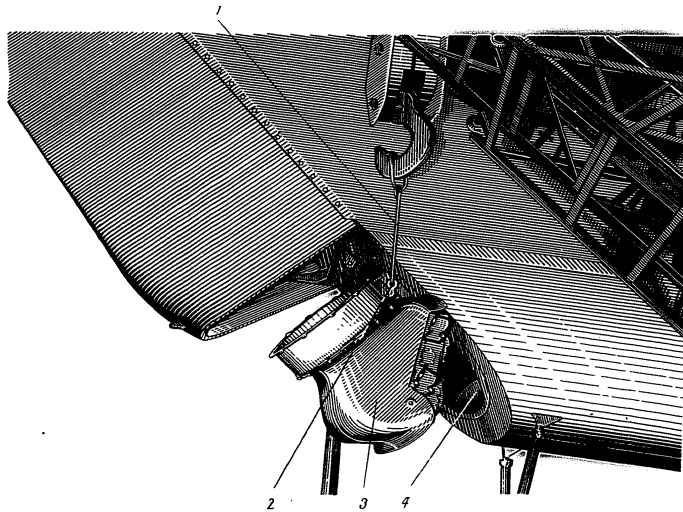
REMOVING INTERMEDIATE GEAR BOX
